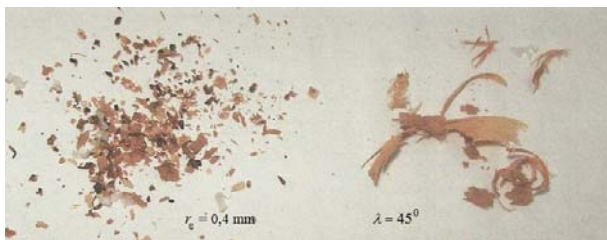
Photography of chips created at classical turning and during turning with a tool with helical cutting edge
